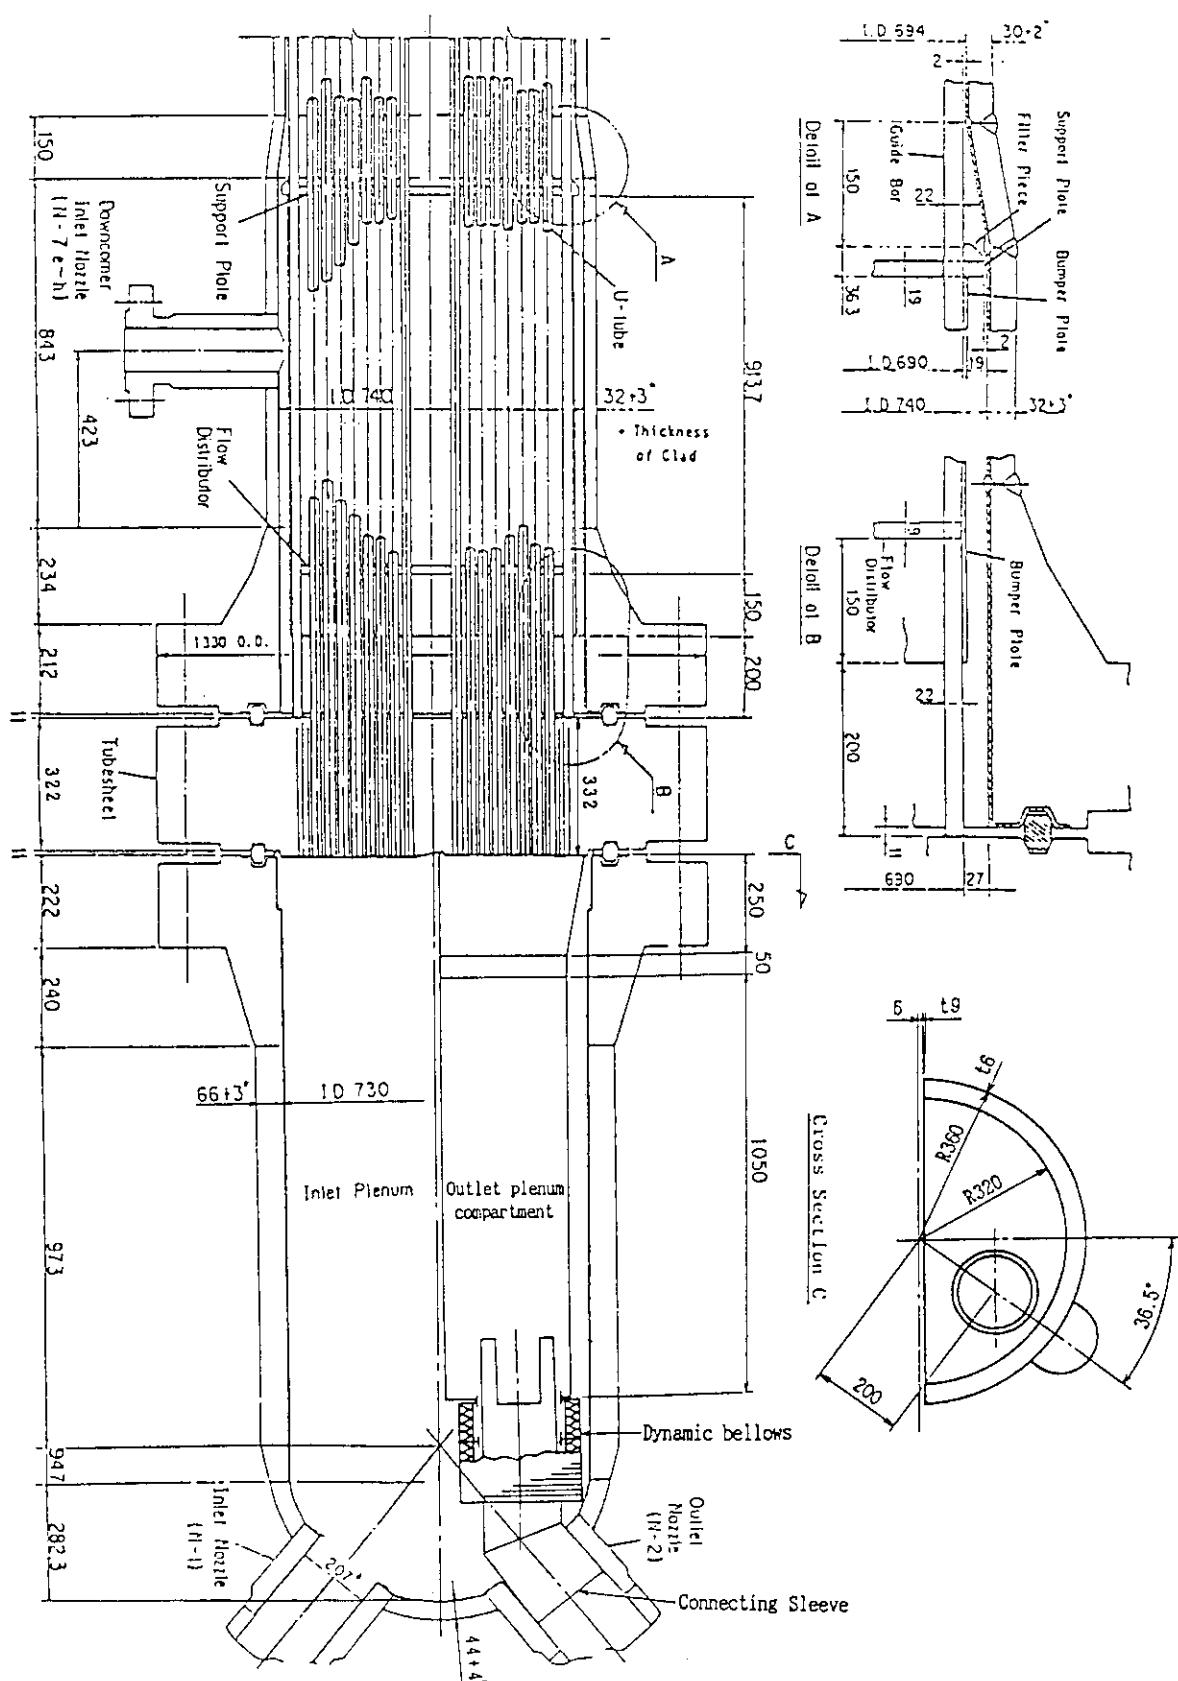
(a) Details of SG Plenum and Tube Sheet
